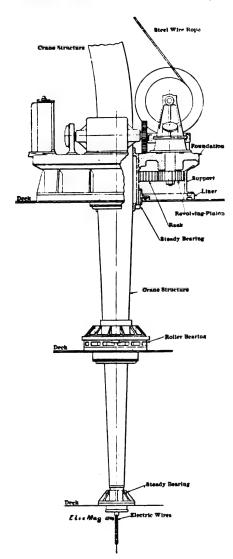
ELEVATION OF ELECTRIC BOAT CRANE.
